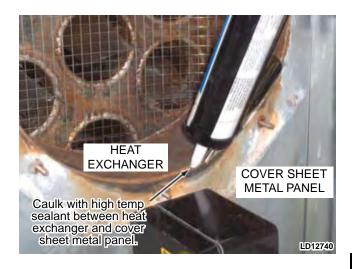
CAULK BETWEEN HEAT EXCHANGER AND SHEET METAL COVER SPANEL
